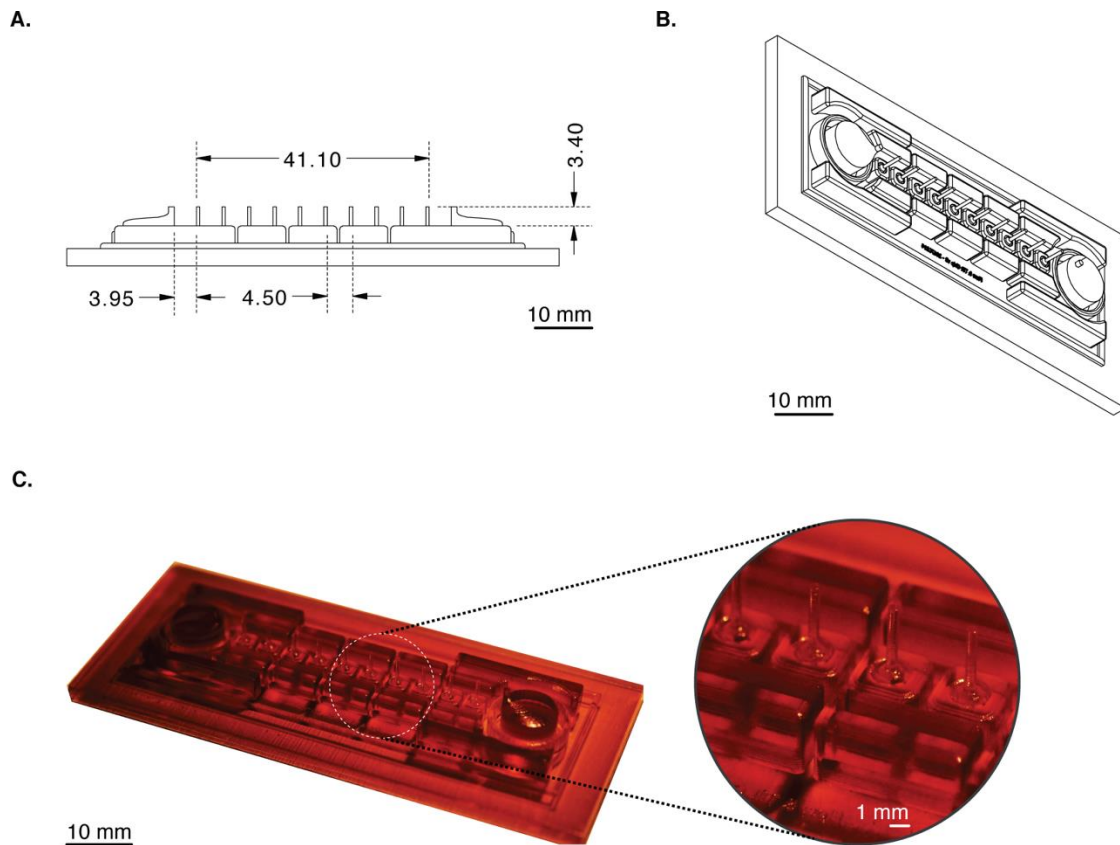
3D-printed mold used for tissue trap and reservoir production. (A) A CAD drawing of the design of the mold used to produce the tissue traps and reservoirs. (B) A side-view of the mold. (C) A photo of the mold. The zoomed-in photo shows long columns that were produced to connect the tissue loading ports to the tissue traps inside the chip.
